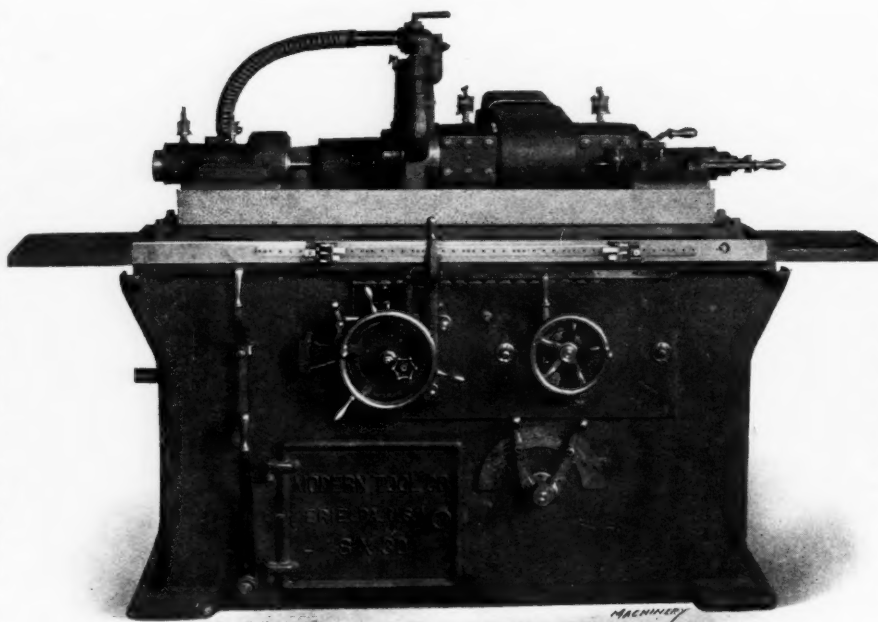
Front View of Modern 8- by 30-inch Self-contained Grinder, with Heavy Type of Drive
